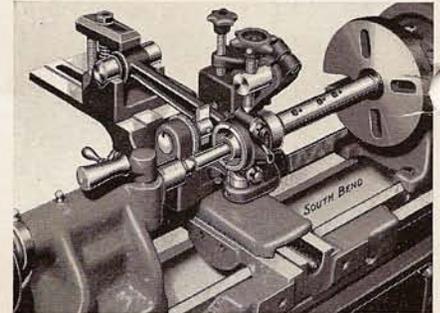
Boring, Facing and rounding a Rebabbitted Connecting Rod in the Lathe.
